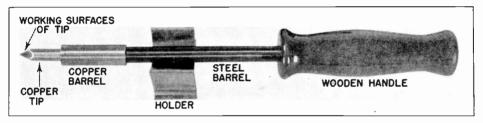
Plain soldering iron for radio work. This can be used anywhere, for it simply requires a source of heat such as a torch or alcohol burner. You have this soldering iron in Radio Kit 1RK (identified as Part 1-114) if you previously indicated that electric power would not be available for your practical demonstration course. The correct position of your soldering iron holder (Part 1-2) is also shown; this holder should be close to the copper barrel but should not touch it.
